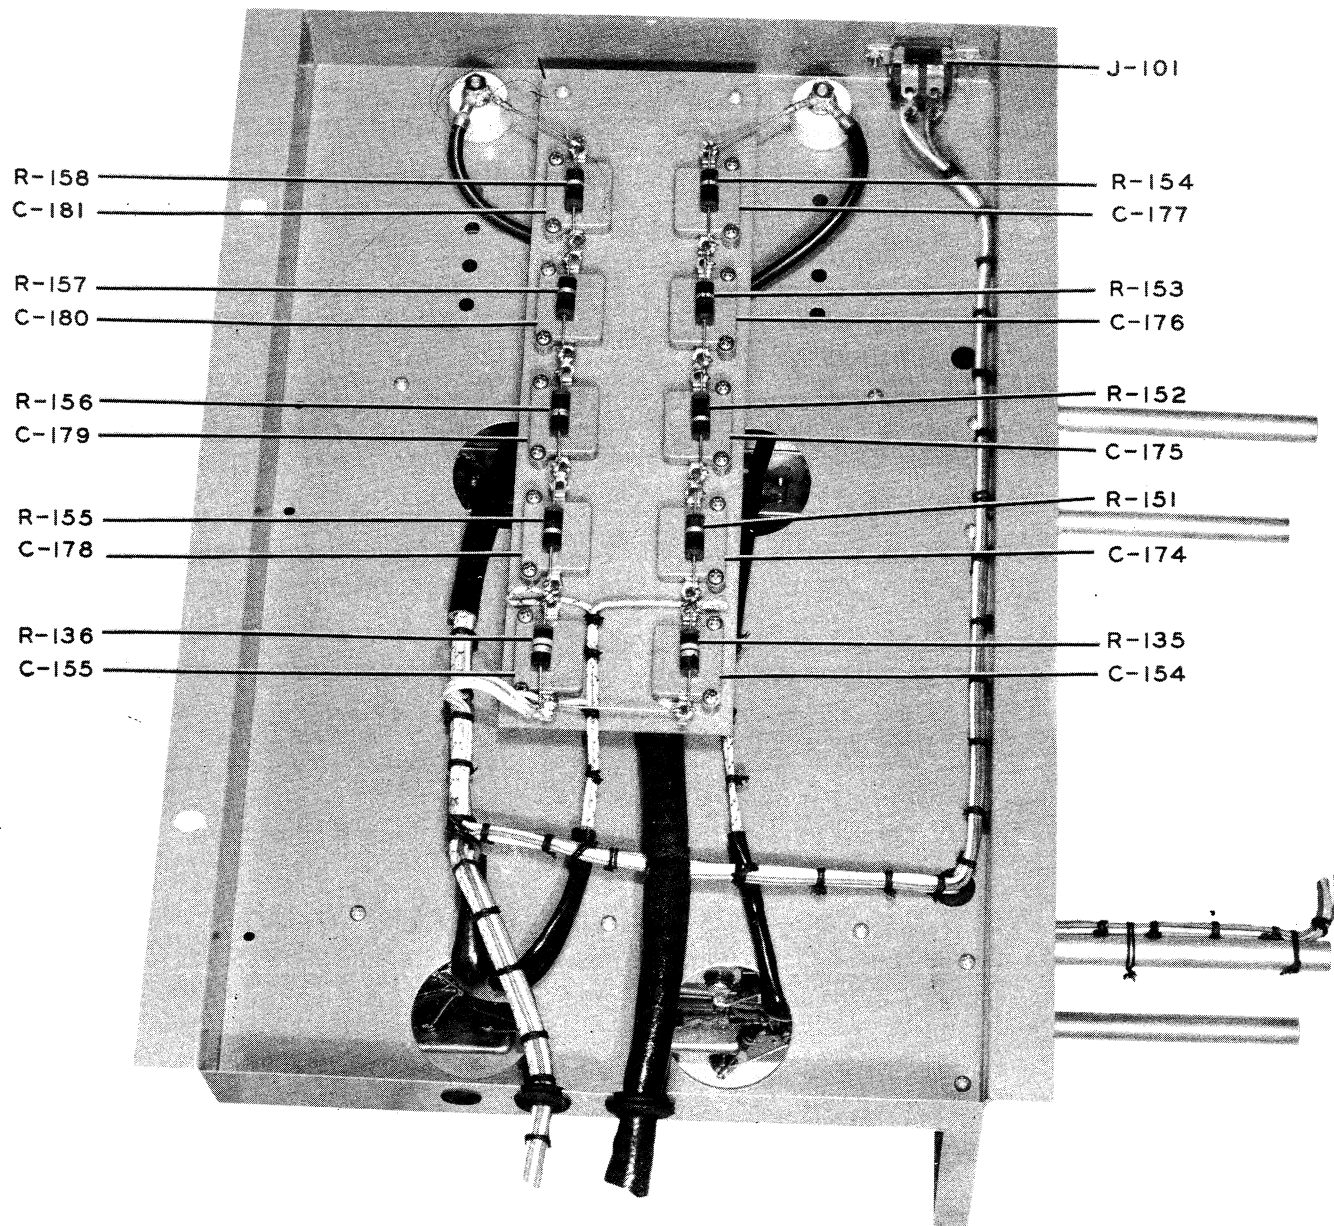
II AUDIO CHASSIS PARTS ARRANGEMENT, SIDE VIEW
